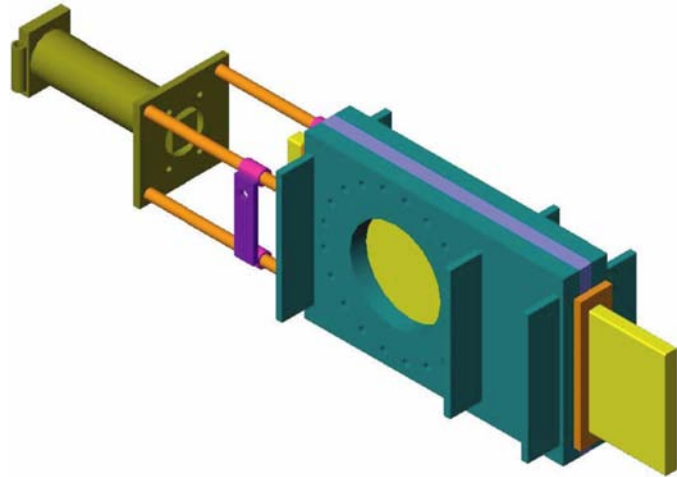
14 in. Stargate O-Port 900 class valve with hydraulic actuator.
